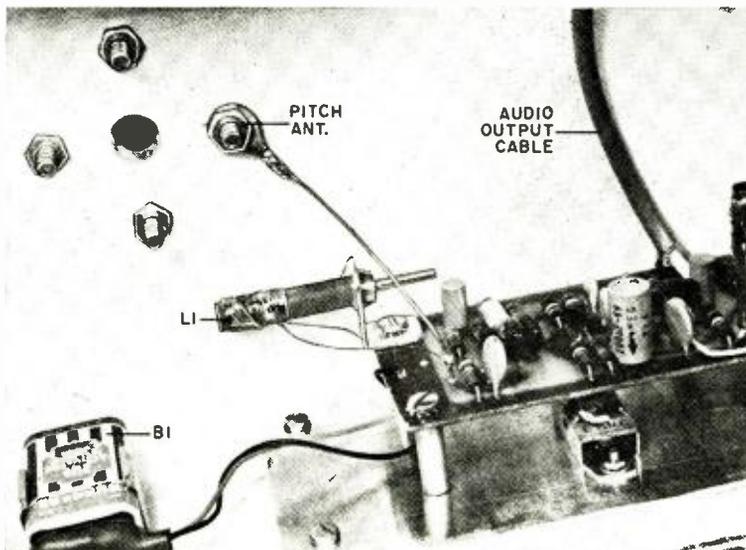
Coils L1 and L3 should be mounted on L-brackets. Positions of these coils can be altered to change harmonic content (see "Tuning" instructions in text). Photo at far right demonstrates how insulated jumper wire between C15 and R20 should be routed.
